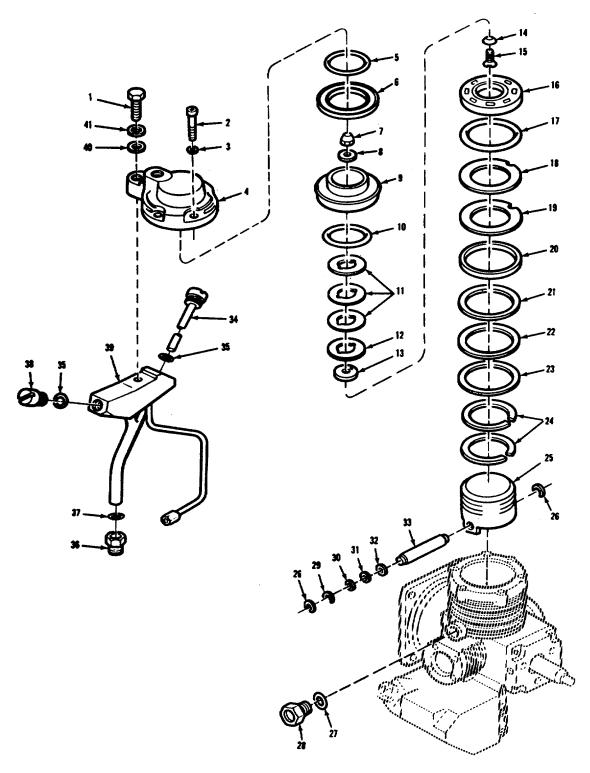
Third stage cylinder, cylinder head, and related parts – exploded view
